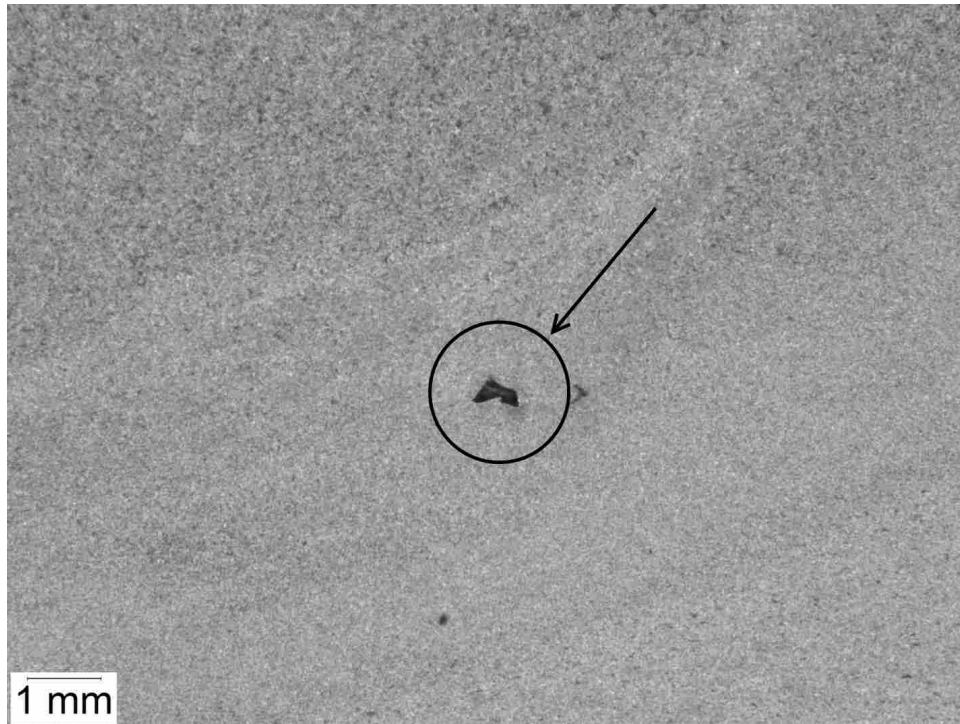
Example of a worm-hole defect. This weld was run at 7 inches per minute in Heat 183.
